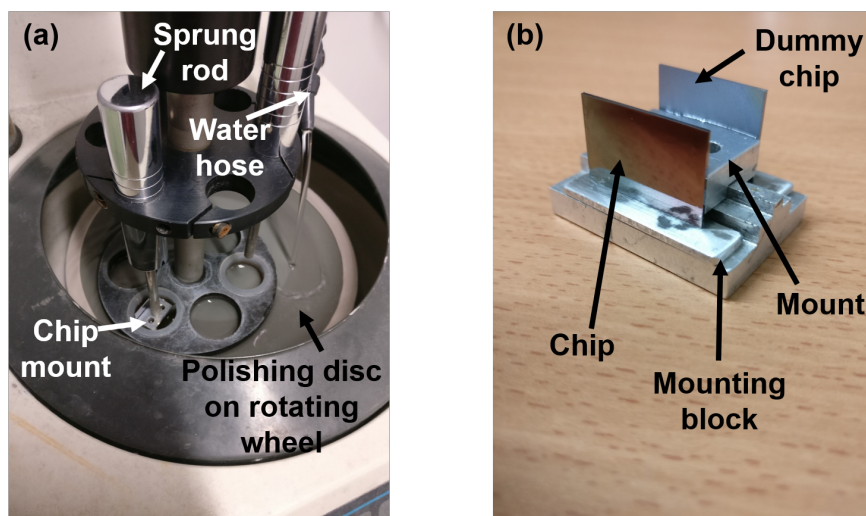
Photographs of the apparatus used for the polishing of waveguide end facets: (a) sample in the polishing tool; (b) sample to be polished on the chip mount.
